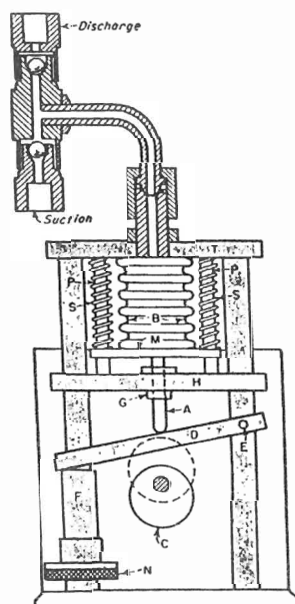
6 Cam - actuated pump having a stainless - steel bellows.
